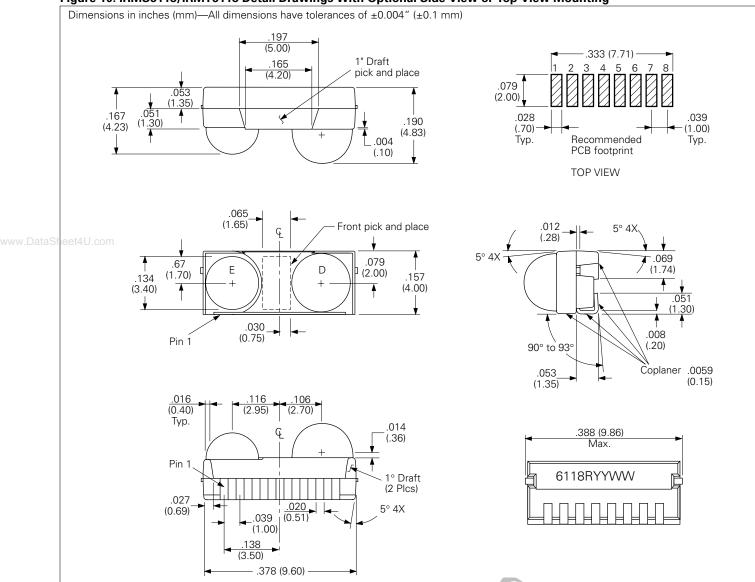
IRMS6118/IRMT6118 Detail Drawings With Optional Side View or Top View Mounting
